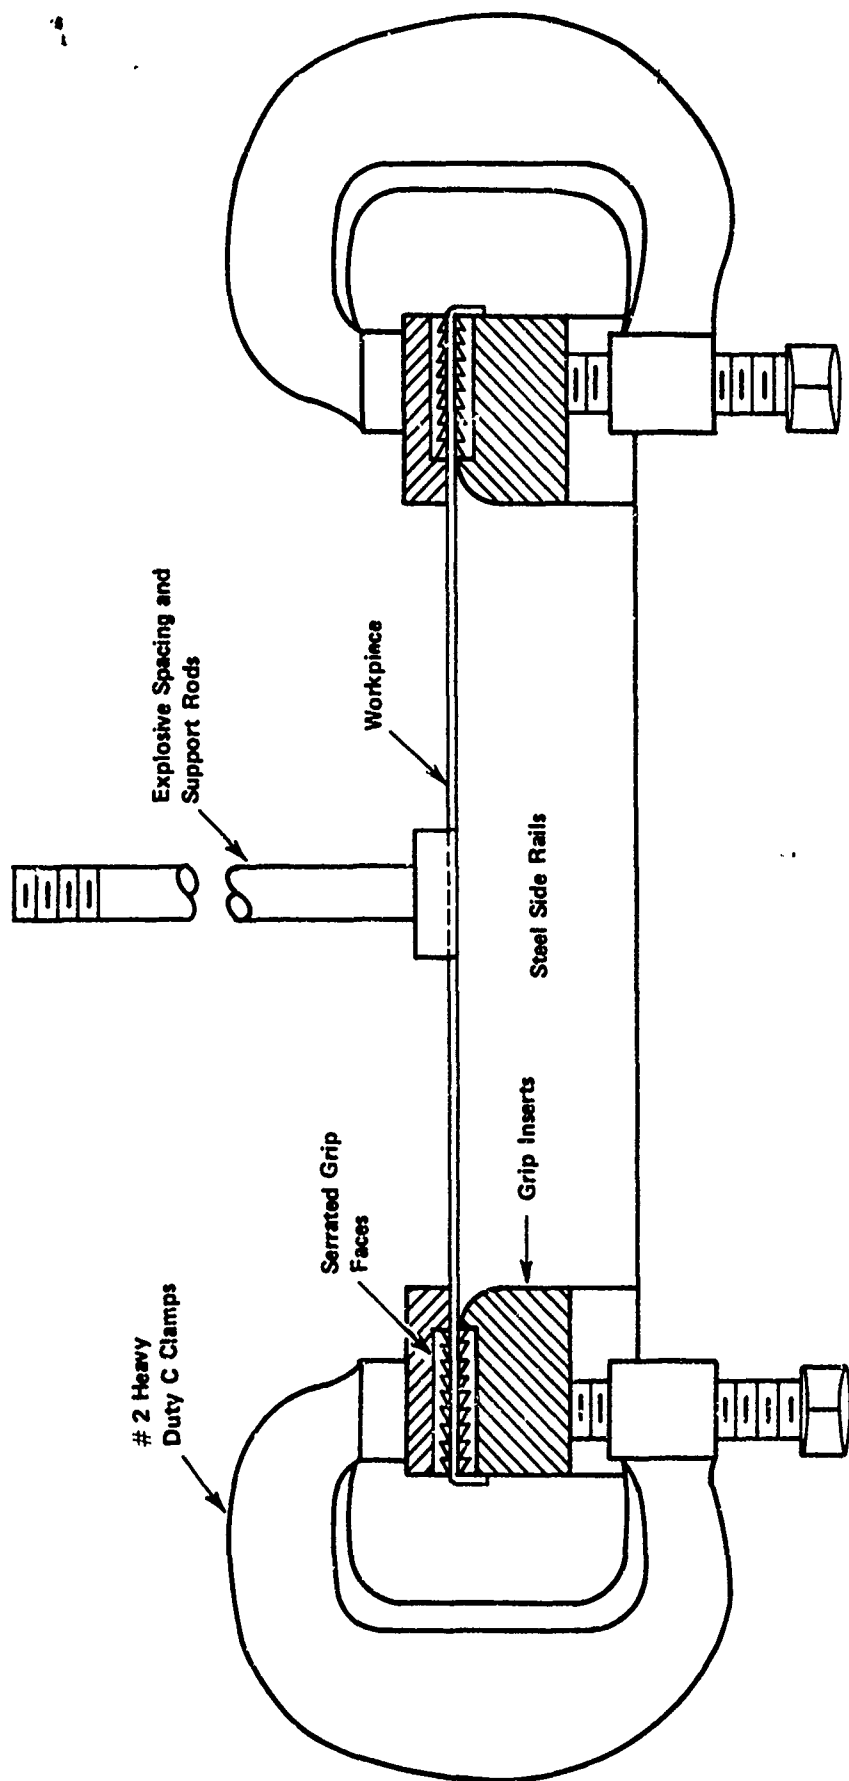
Schematic side view of rectangular explosive stretch forming die.
